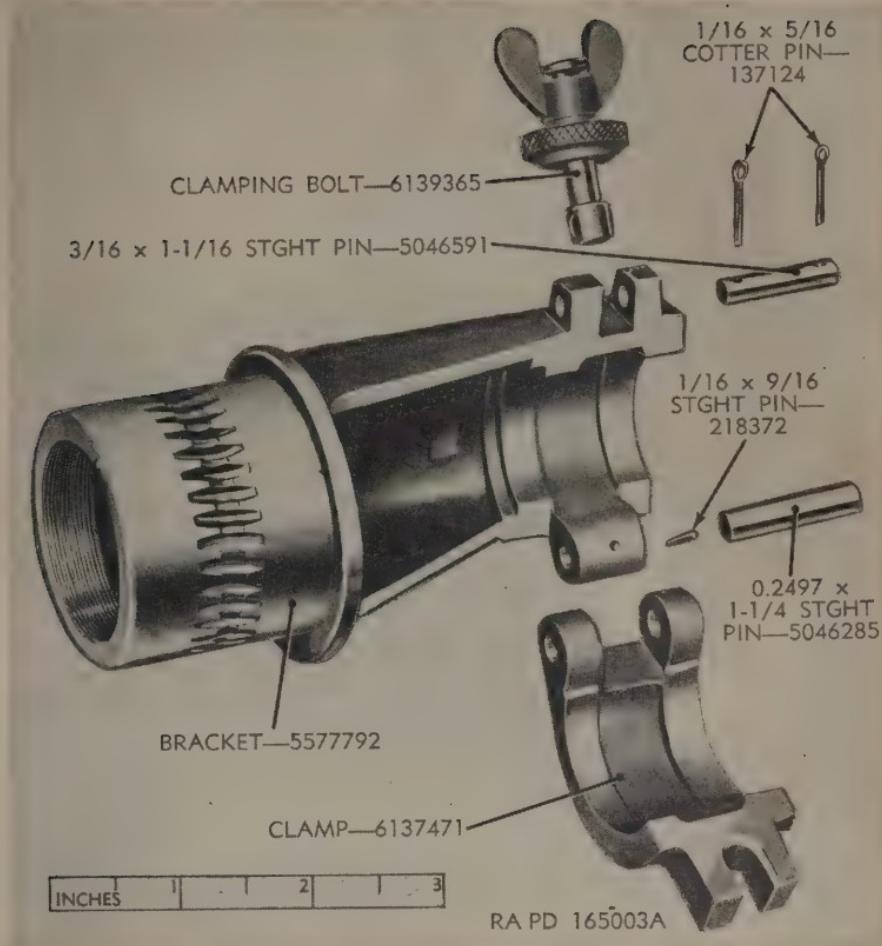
Telescope mount M23—telescope bracket assembly—exploded view.
